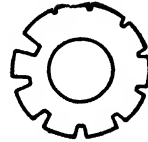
Gage for Checking Size and Proportion of Acme Threading Tool Point After Grinding.
